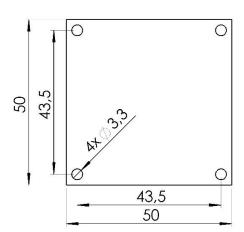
PMT u-CSA&SA EVM board dimensions.
